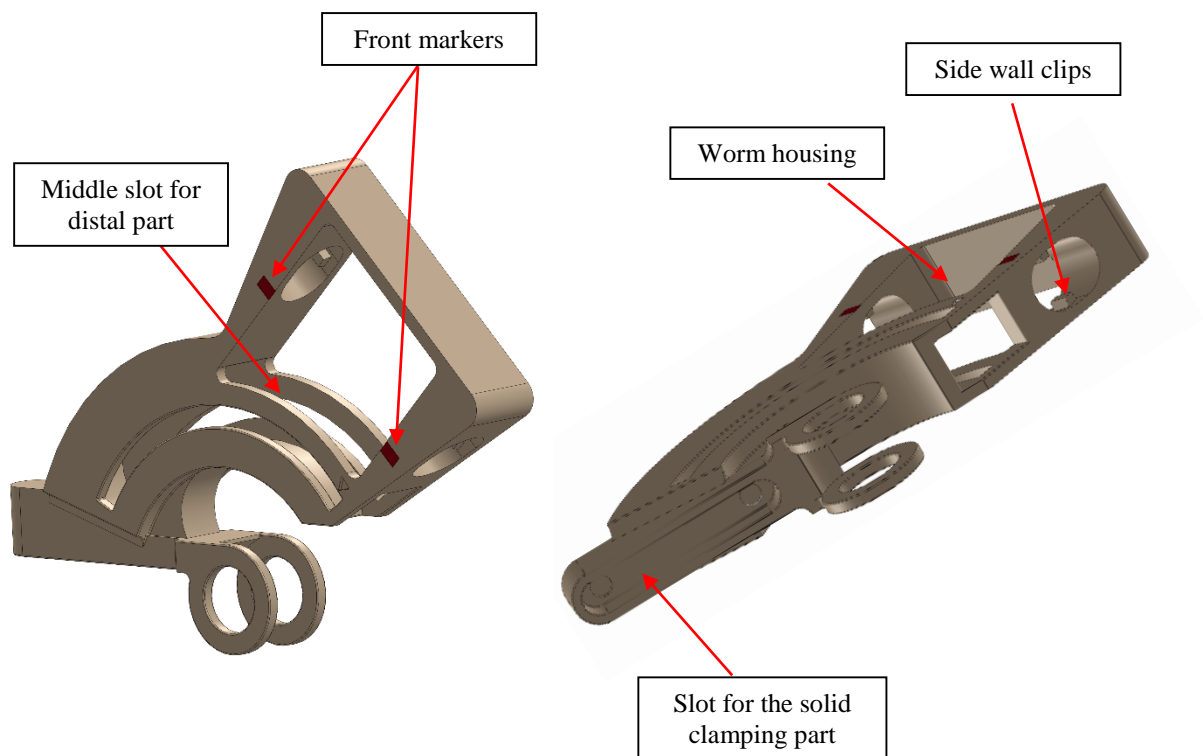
3D design assembly of the PIP joint protractor hinge final design.
